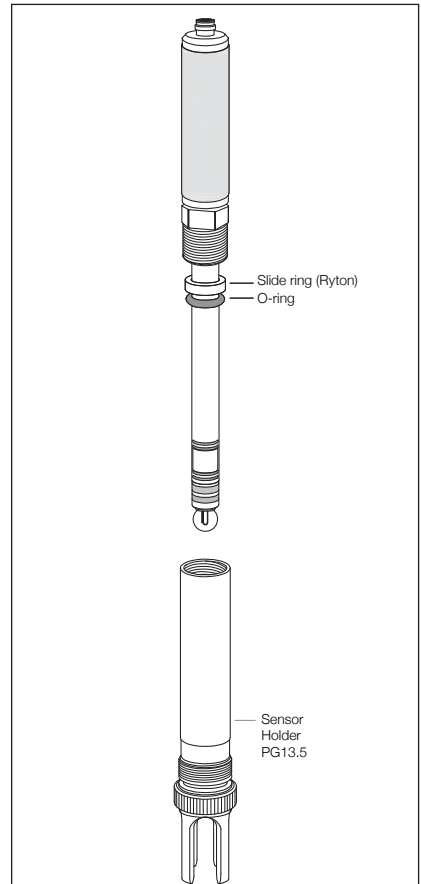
Simple mounting of sensor in PR10 retractable fitting
